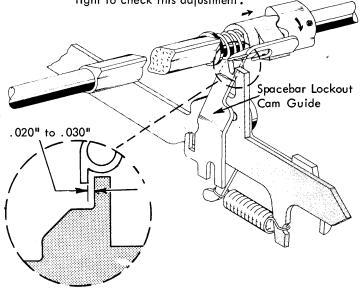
Spacebar Lockout Cam Guide Adjustment
